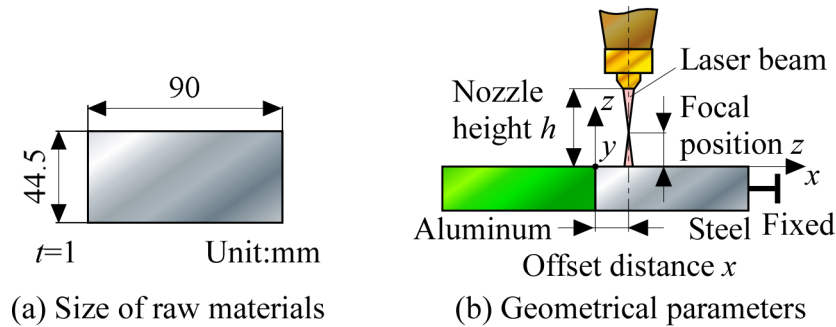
Size of raw materials and geometrical parameters of laser welding.
